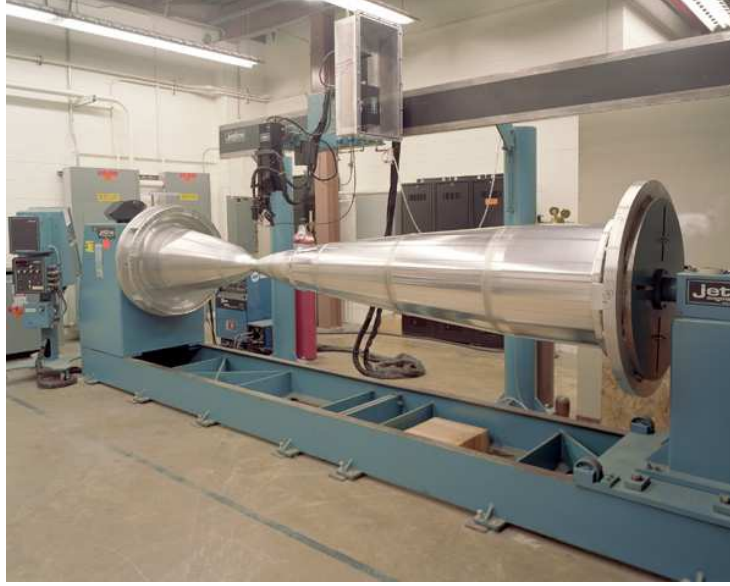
NuMI horn 2 inner conductor on the welding machine.
